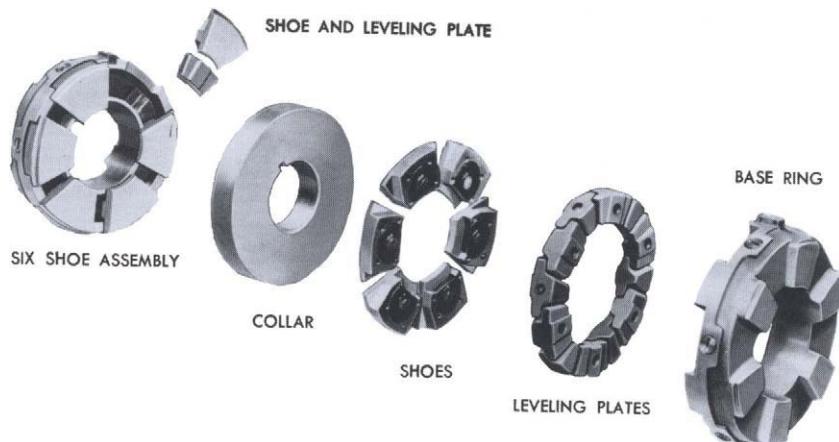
Small Kingsbury six-shoe two-direction thrust bearing. Left-hand group assembled, except for one shoe and 'upper' leveling plate. Right-hand group disassembled. (Courtesy of Kingsbury, Inc)
